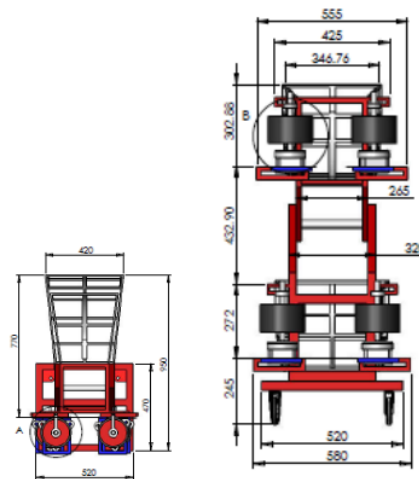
The assemble of ZPD 01 ball throwing from the top and front view
